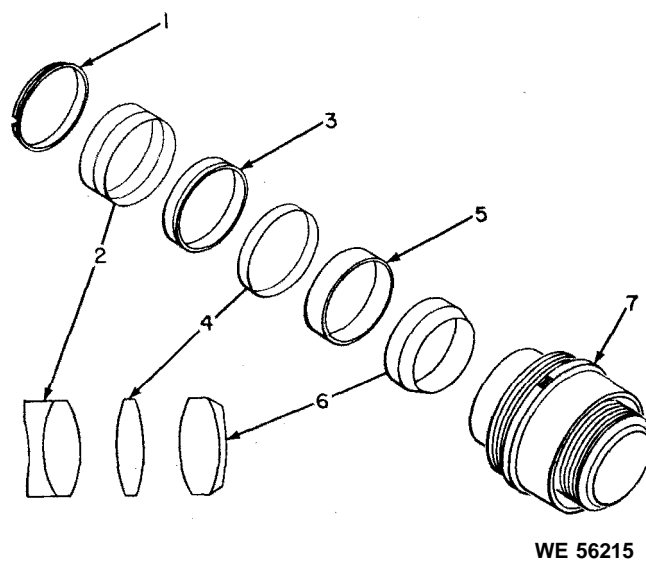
Right eyepiece assembly 8215543-exploded view.
